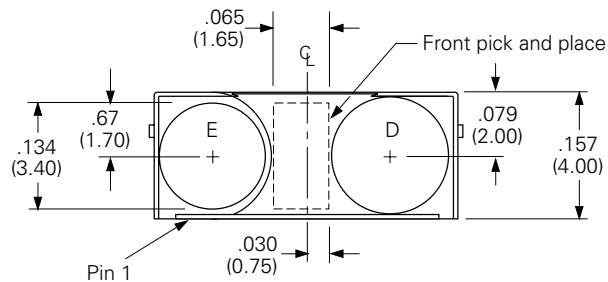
IRMS6118/IRMT6118 Detail Drawings With Optional Side View or Top View Mounting
